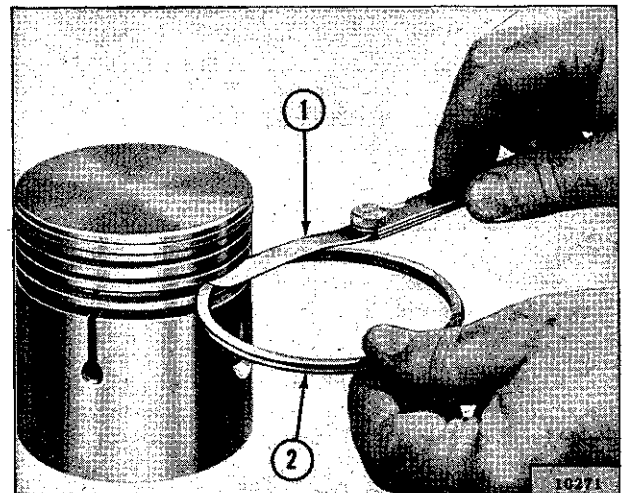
CHECKING PISTON RING SIDE CLEARANCE
